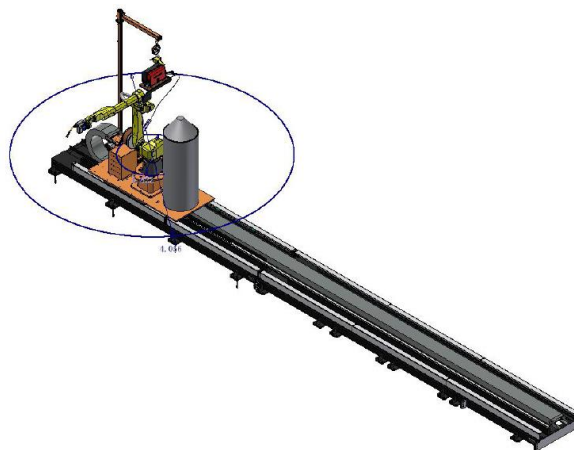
Walking mechanism of chassis frame welding robot
